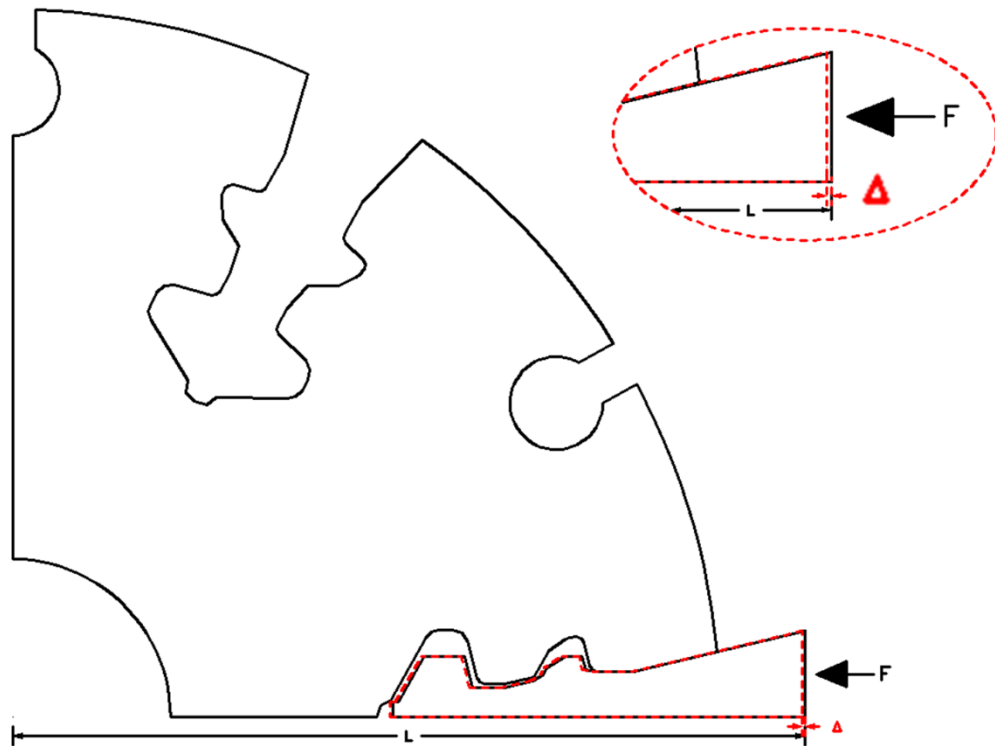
Geometrica® 6Sd-00 Jointing System Axial Compressive Semi-Rigid Configuration
